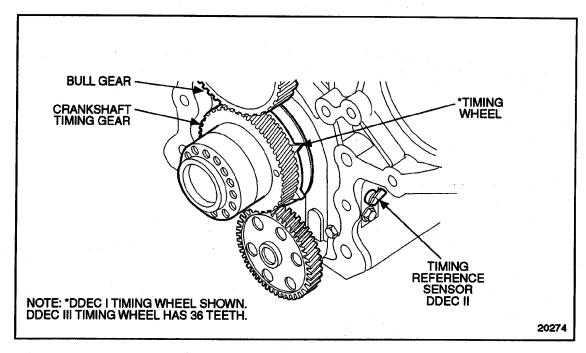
Crankshaft Timing Gear and Related Parts Location
